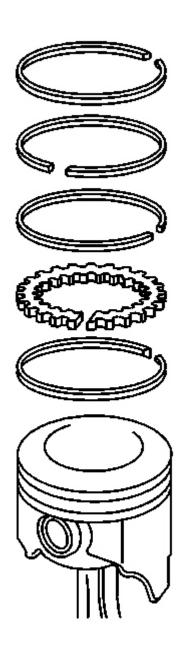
Exploded View Of Piston Rings Courtesy of GENERAL MOTORS CORP.
